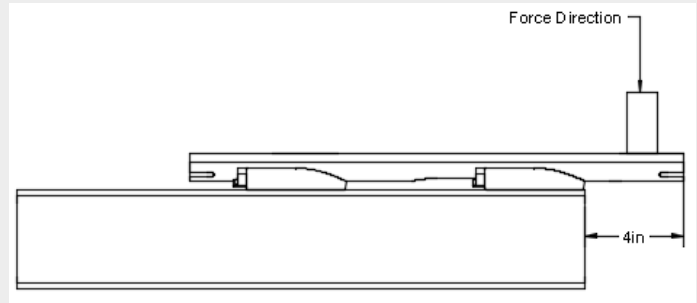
Transverse View IS20 Part, anchor and force block
